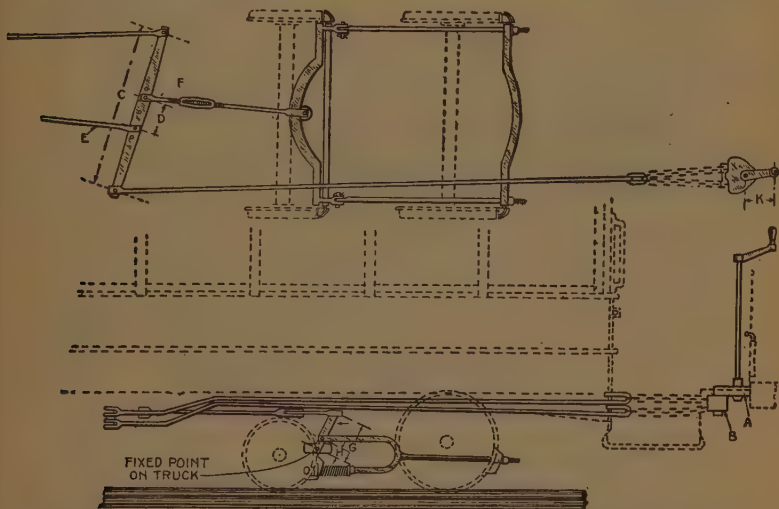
,667.—Geared brake. This apparatus has a pinion A, on the lower end of the *brake staff*, which engages a gear B, made in one piece with a double sprocket wheel. The two chain loops running through these sprocket wheels engage two hooks formed on the end of the brake rod, or two separate brake rods which are attached at the same point the sway bar. The upper chain is the only one used in braking, the other being left slack and held in reserve for use if the first set fail to work. When the brake is applied to a car mounted on maximum traction trucks as shown, the difference in pressure between the brake shoes on the driving wheels and those on the pony wheels is obtained by means of a spring interposed between the brake system and the pony wheel brake shoes. The dimensions of the different levers are as follows: Length of sway bar C is 48 inches; distance D between pins for the arch bar rods E and F is 9 inches; length truck lever B is 13 inches; and length of horizontal part of brake handle K is 15 inches. With levers of these dimensions a force of 65 pounds applied at the brake handle gives a total braking pressure of 29,000 pounds, or an amount exceeding the weight of an empty car. The best proportion of the lever is secured when, $(C \div D) \times (G \times H) \times 85k = \text{total weight of the empty car}$.
